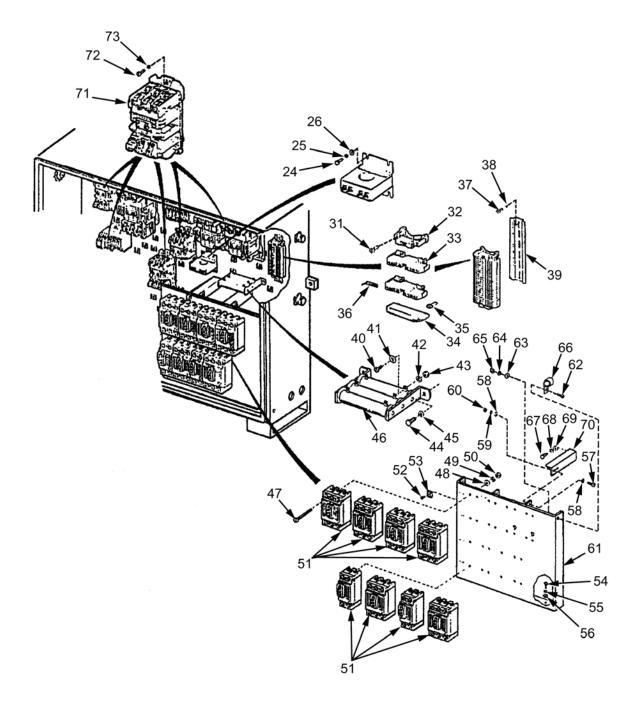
Main Control Panel, Lower Interior Panel (Sheet 2 of 2).
